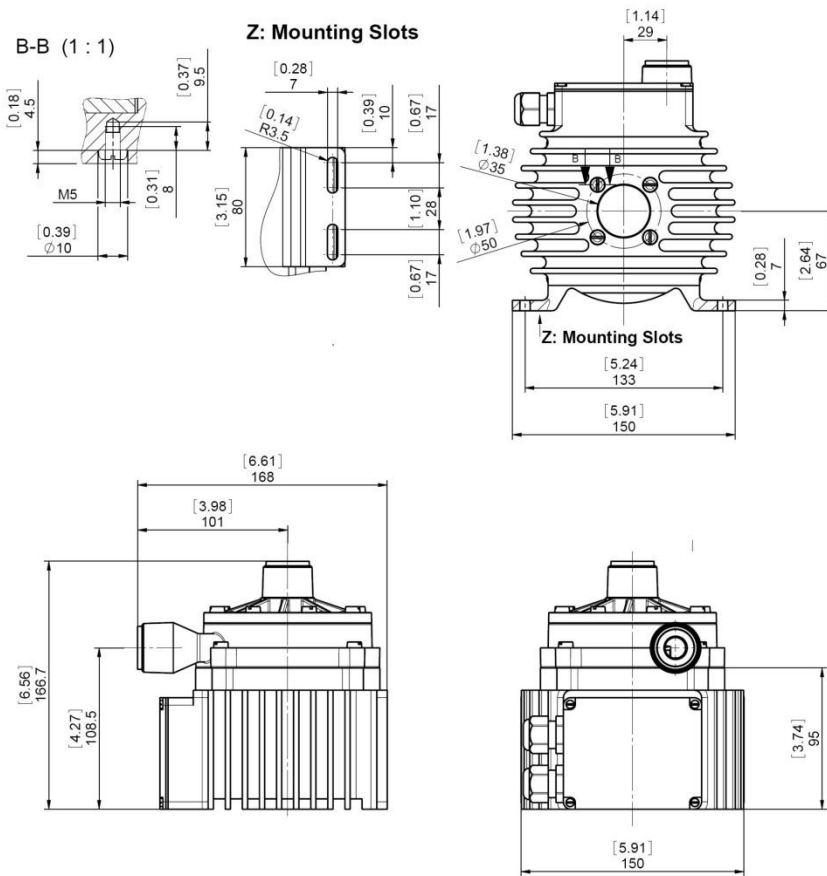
Dimensions of motor with pump heads LPP-600.5 (PP Housing) and LPP-600.13 (PVDF Housing)
